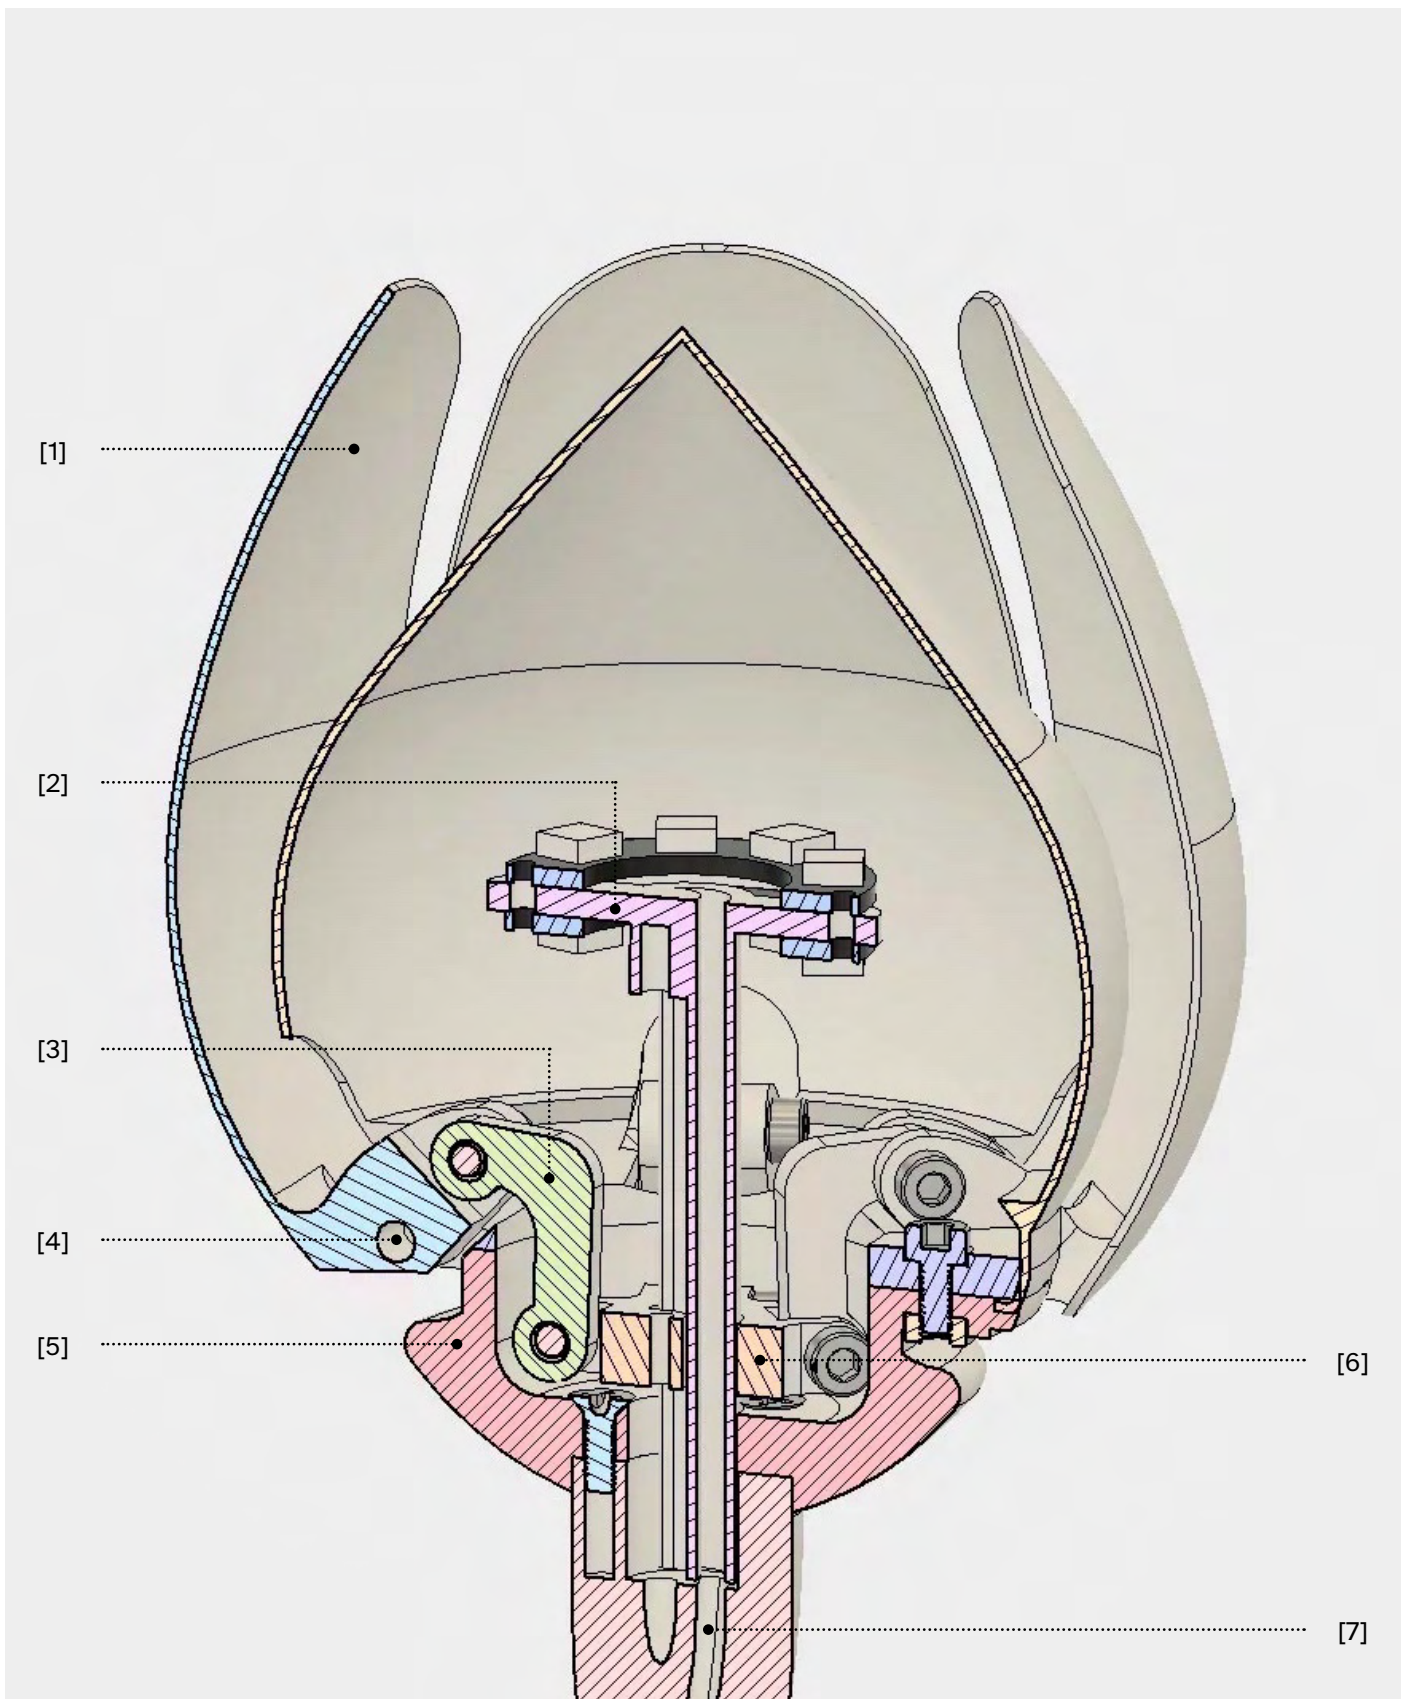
Blooming Flower Night Light Mechanism, Section View (Suter, 2023)
